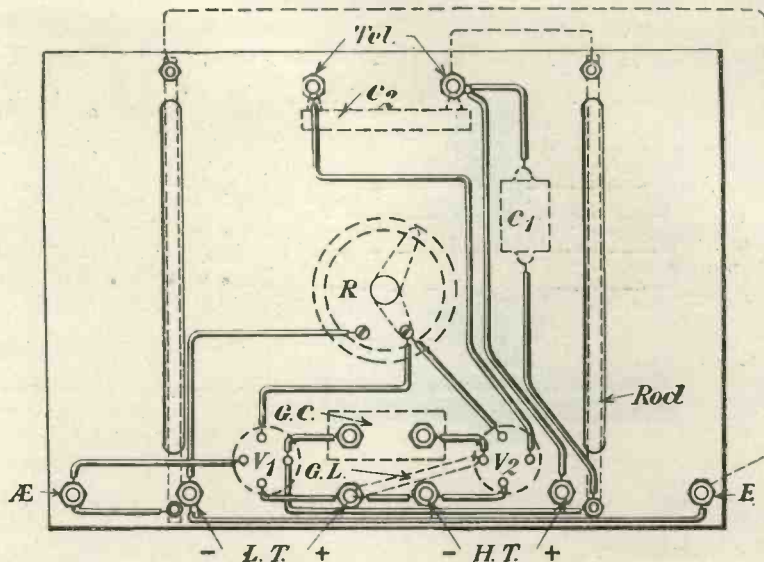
Back-of-panel wiring diagram (before coils are fitted).
